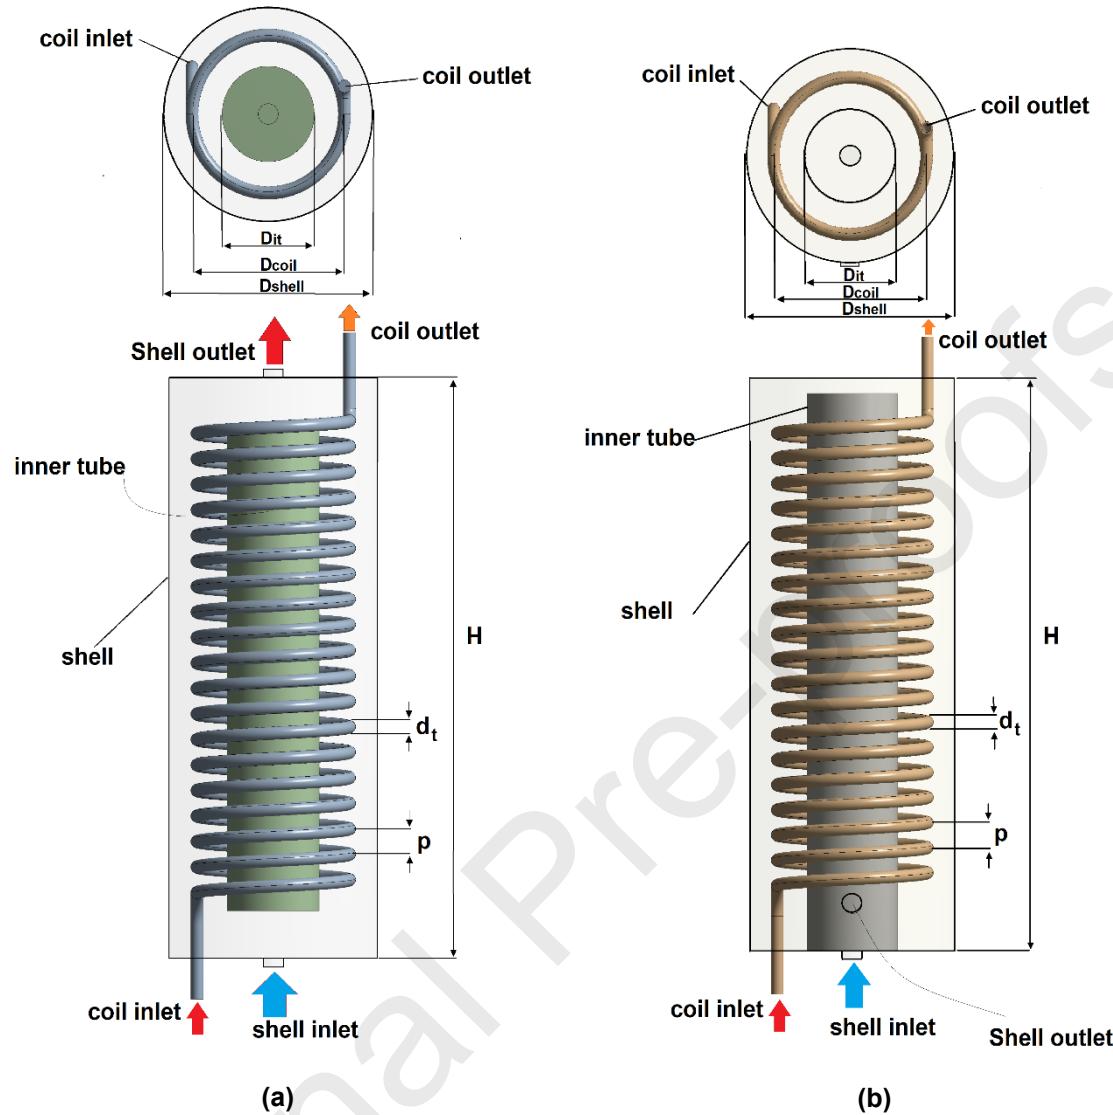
Detailed view of simulated heat exchangers; a) Conventional type HE; b) Modified type HE
